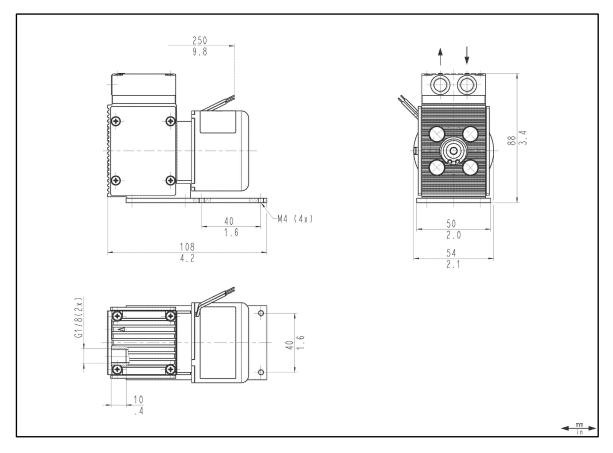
Mounting dimensions pump series N86K_DC-B (2 wires)
